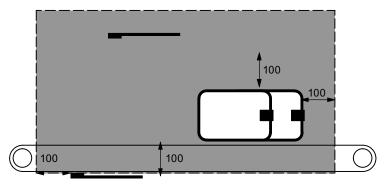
Metal-free space \_side view (using the example of tunnel arrangement on a conveyor belt)
